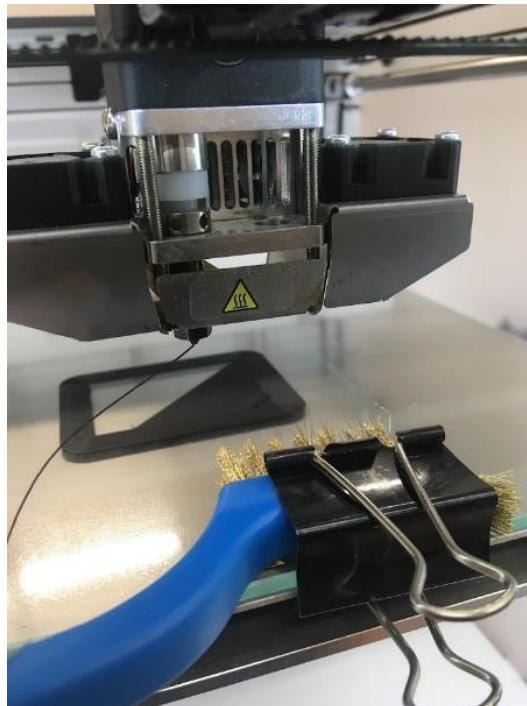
Printing setup: Stock Ultimaker 2+ with hardened steel nozzle and brass brush for nozzle wipe
